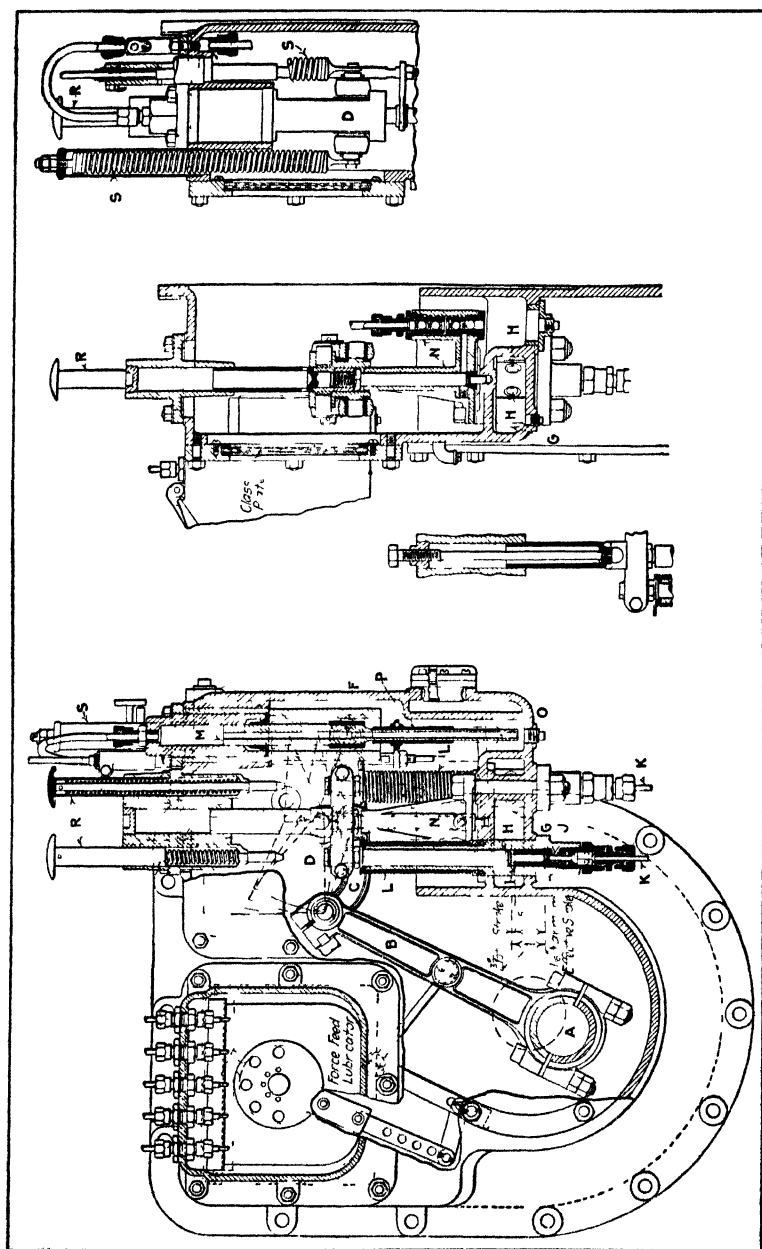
Section Through Fuel Pump Manufactured by the General Electric Co.
